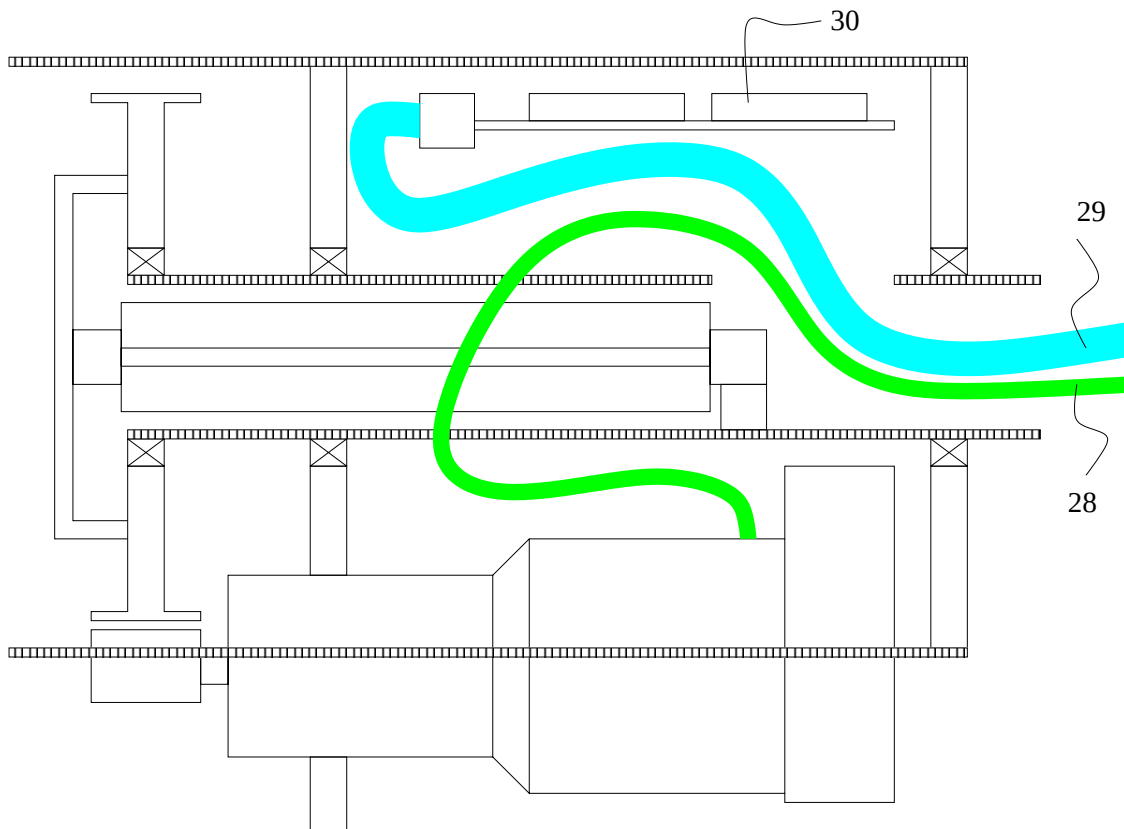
Figure showing how the sensor board (30) is mounted between the supports. The cables from the sensor board (29), and those carrying power to the motor (28) are passed through the tube and so up the arm. Arranging the cables in this way reduces strain on the wires, and reduces the likelihood of cable breakages.
